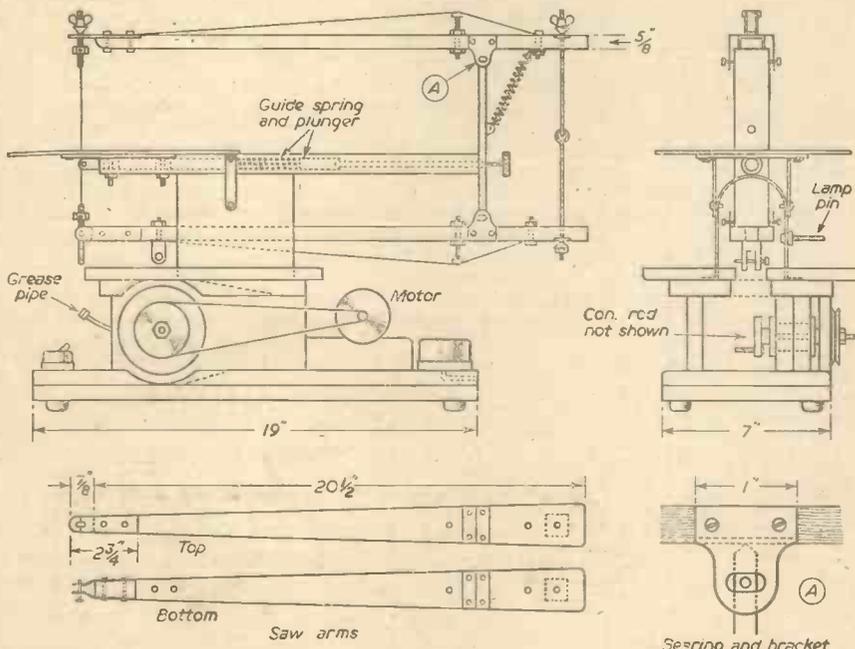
Side and front elevations, and details of saw arms and bearing bracket.
